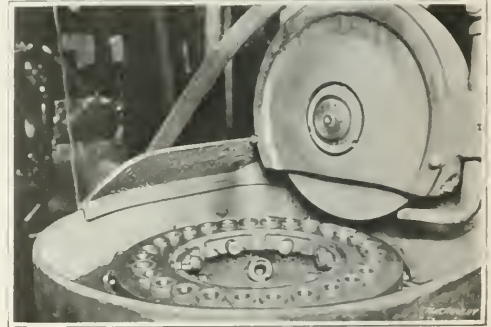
Method of holding and surface grinding Top Flanges of Bushings
